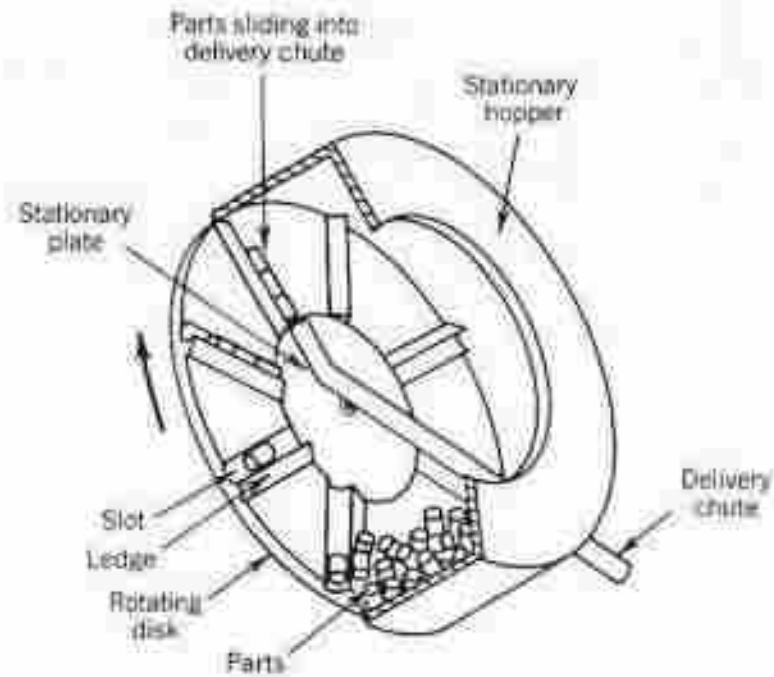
Three ways to feed cylindrical parts, (b) Rotary disk feeder
